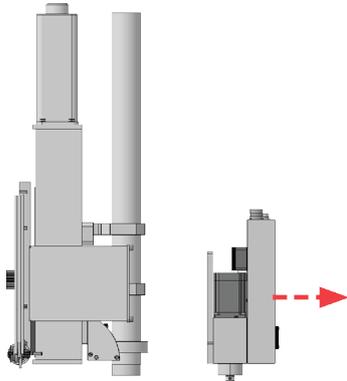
PULLING AWAY THE TANGENTIAL CUTTING HEAD (VIEW FROM THE SIDE)
